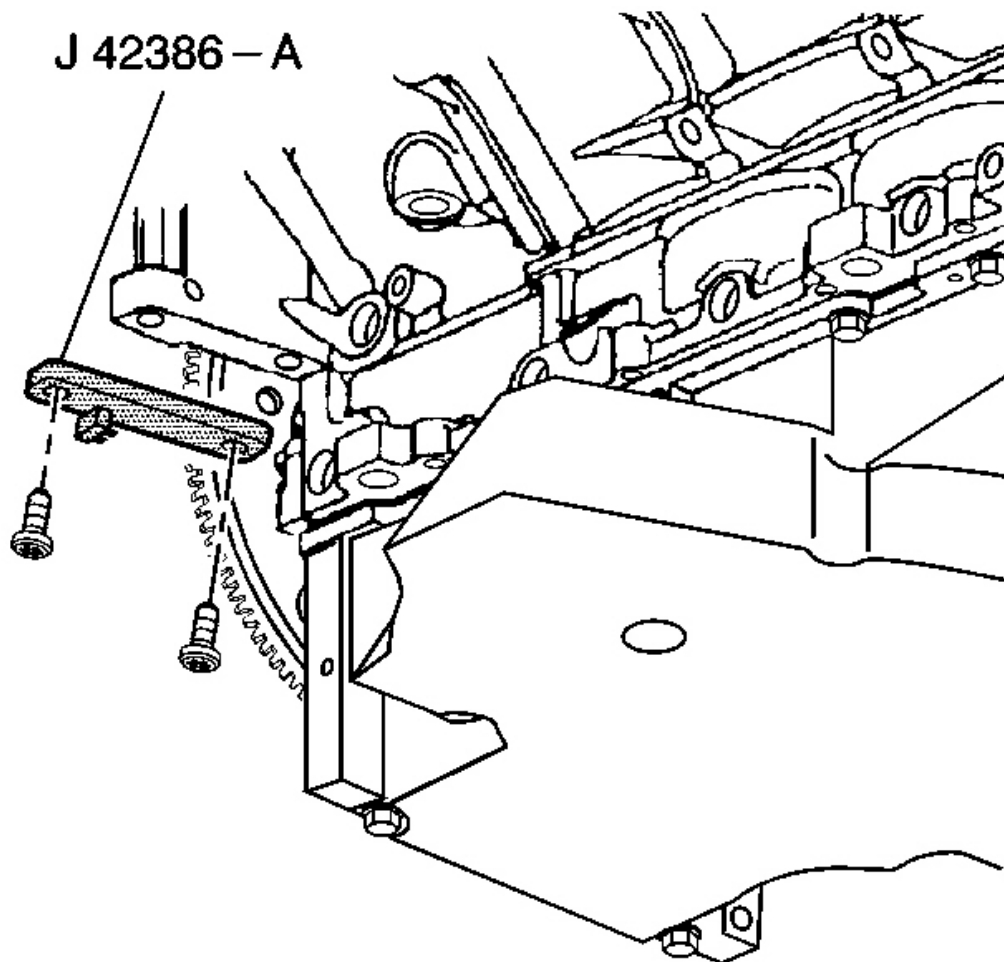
J 42386-A, Crankshaft Balancer & Bolt
